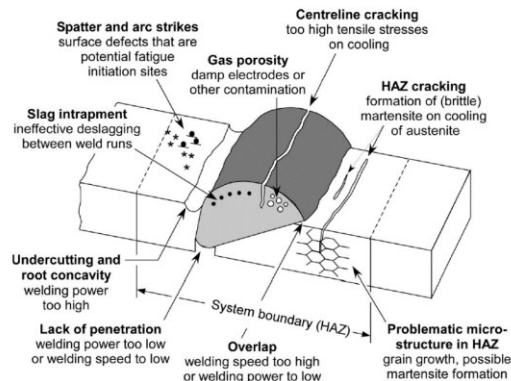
Schematic perspective of some potential weld defects at a welding zone (Zerbst et al., 2014)
